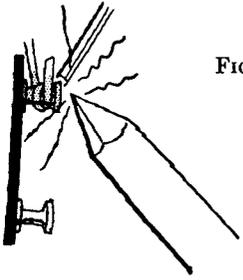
Clearance between terminals should be left for a soldering iron, and the end of the wire should be exposed to allow for removal.
